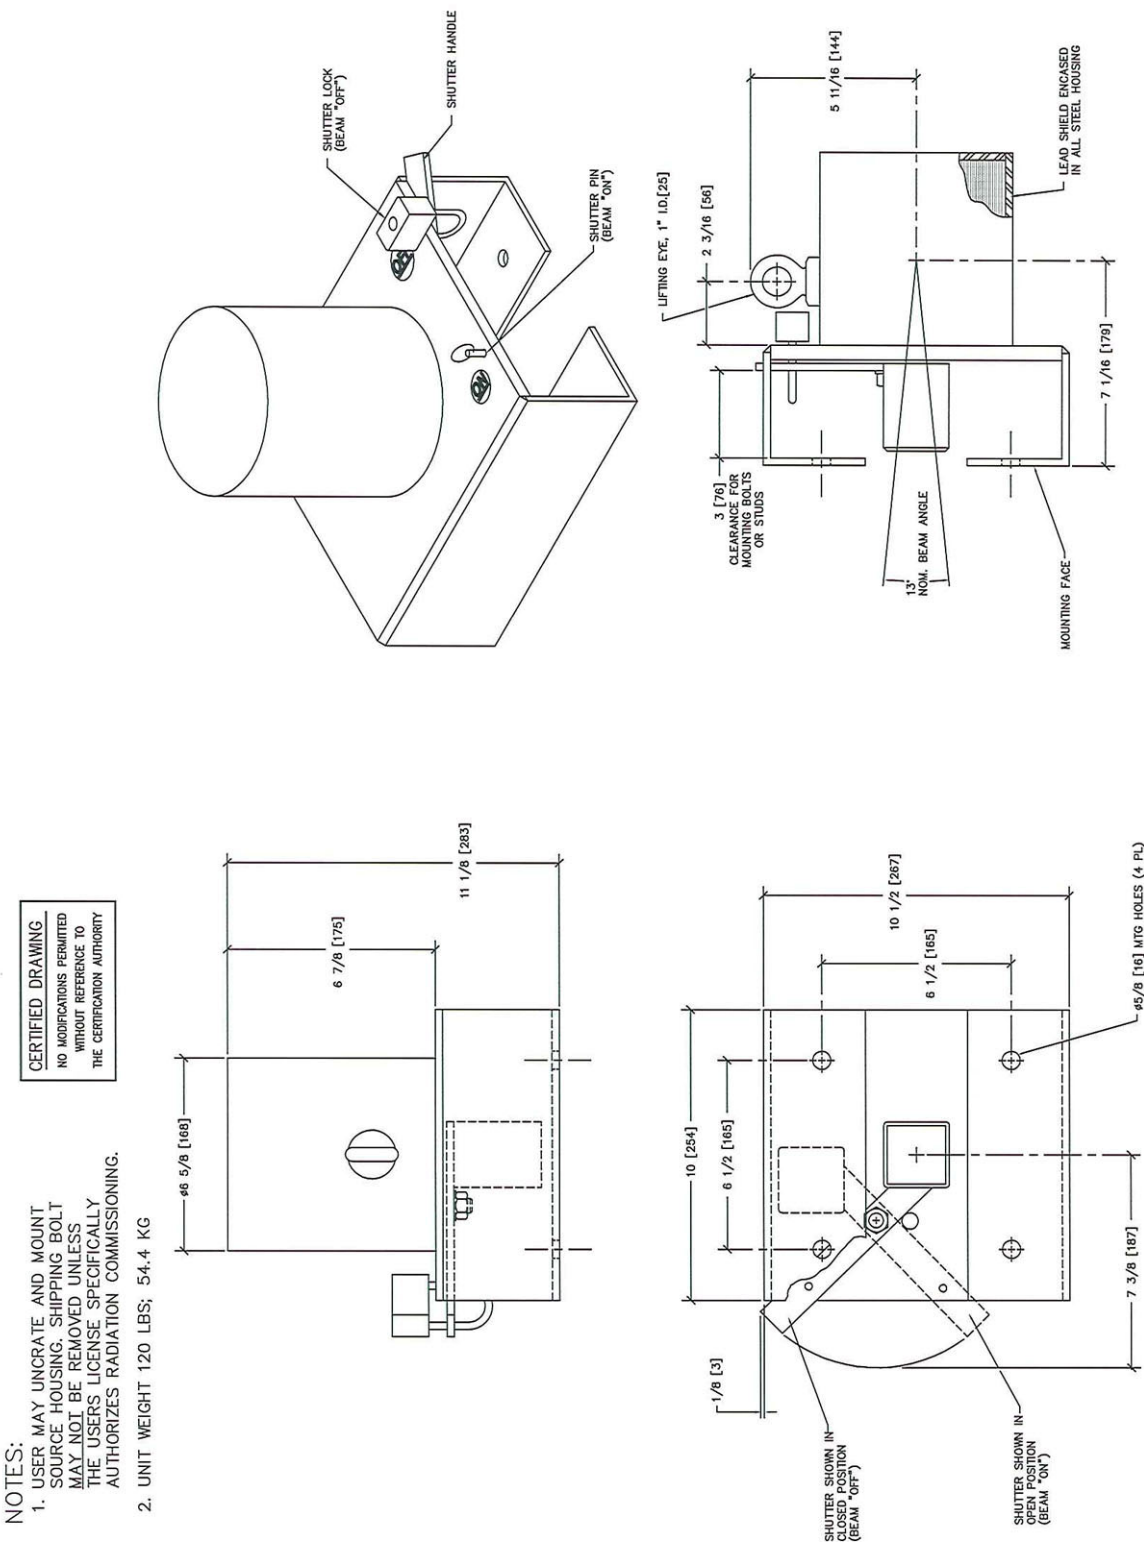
865474: Mounting dimensions, 5203 source housing, 2000 mCi or less (sheet 1 of 1)
